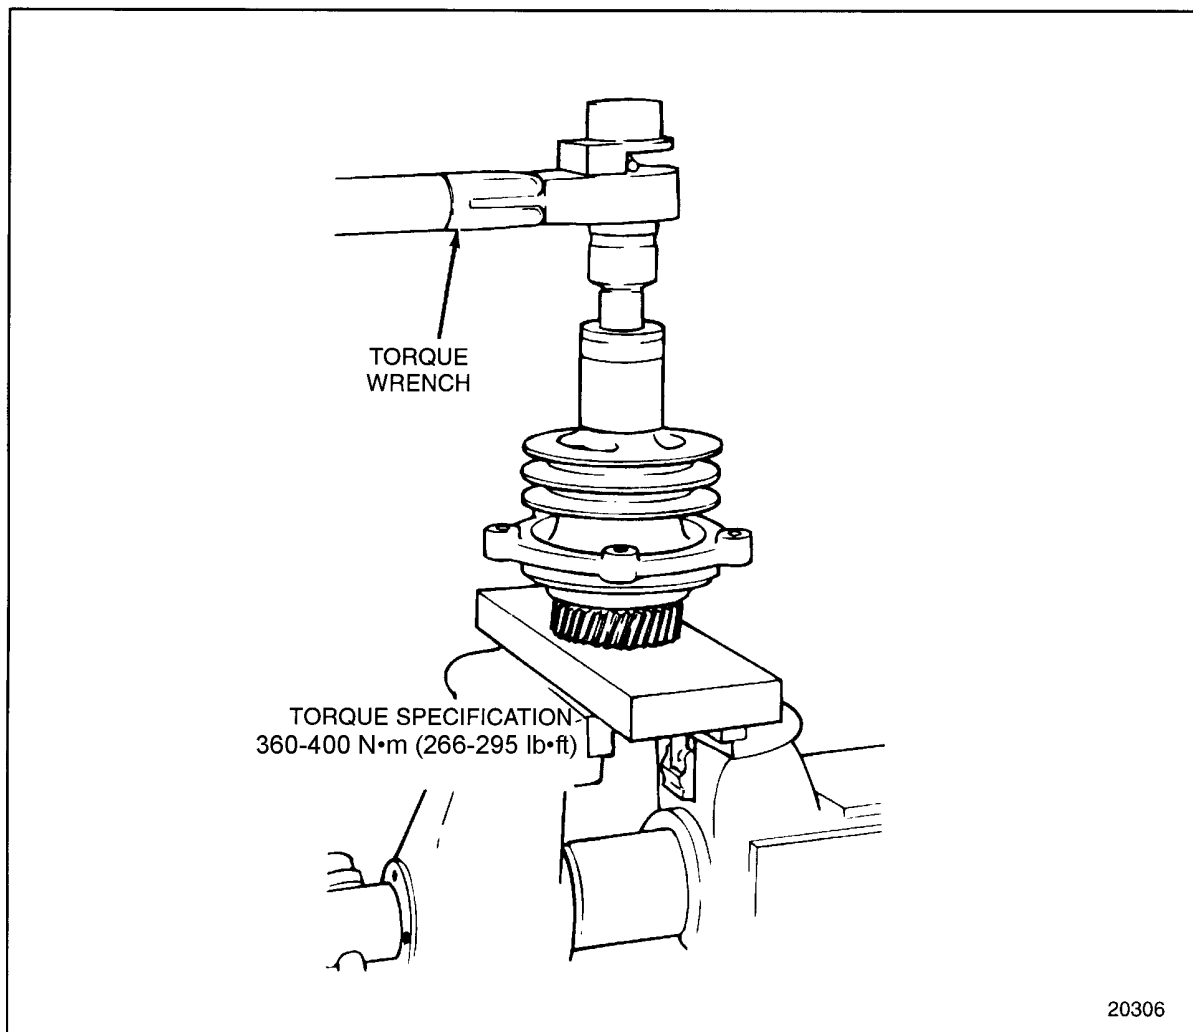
Accessory Drive Pulley Locknut Tightening
